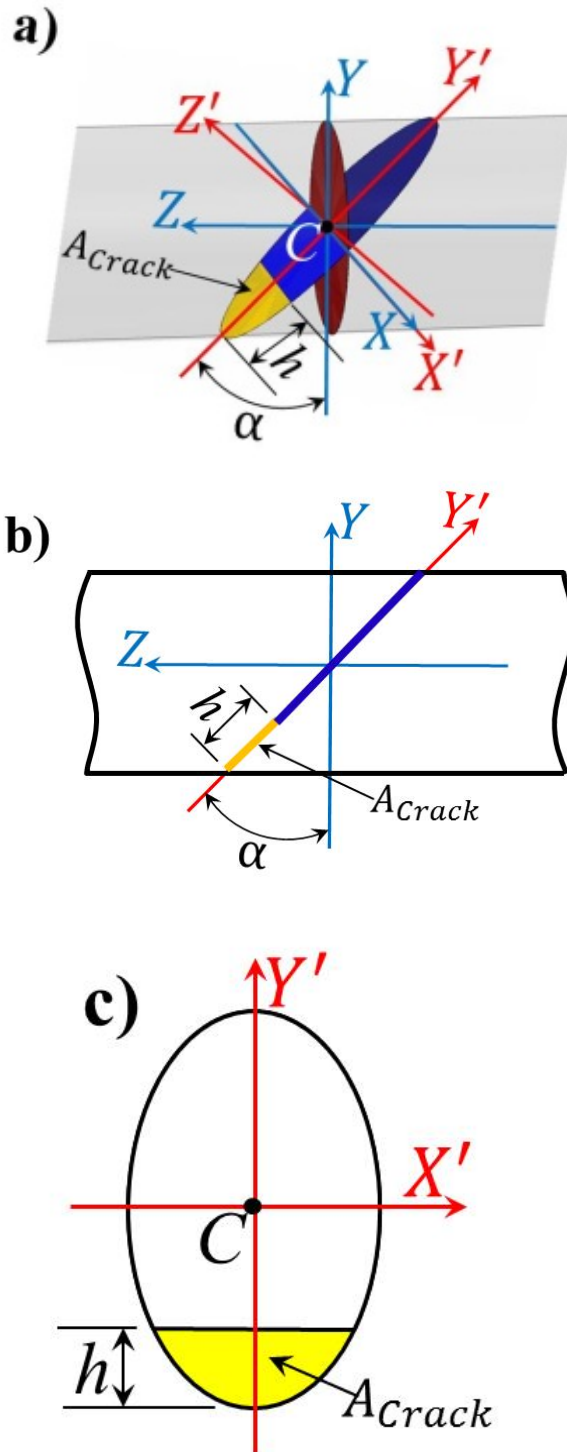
Slant crack: (a) orientation (b) front view and (c) crack plane
